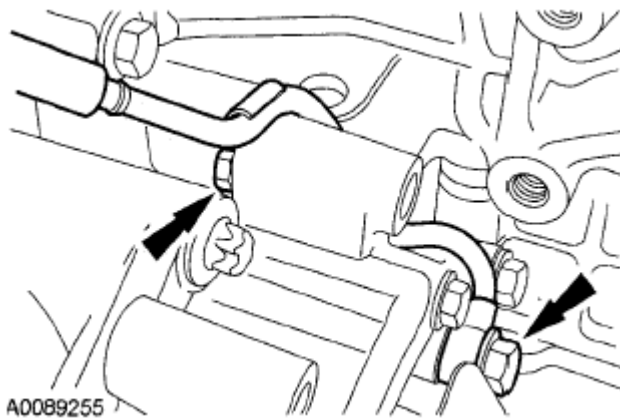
Locating PTU Vent Tube, Pin-Type Retainer And Bolt
